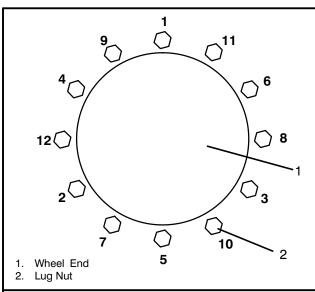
Lug Nut Torquing Sequence for a Twelve Stud Wheel End.
